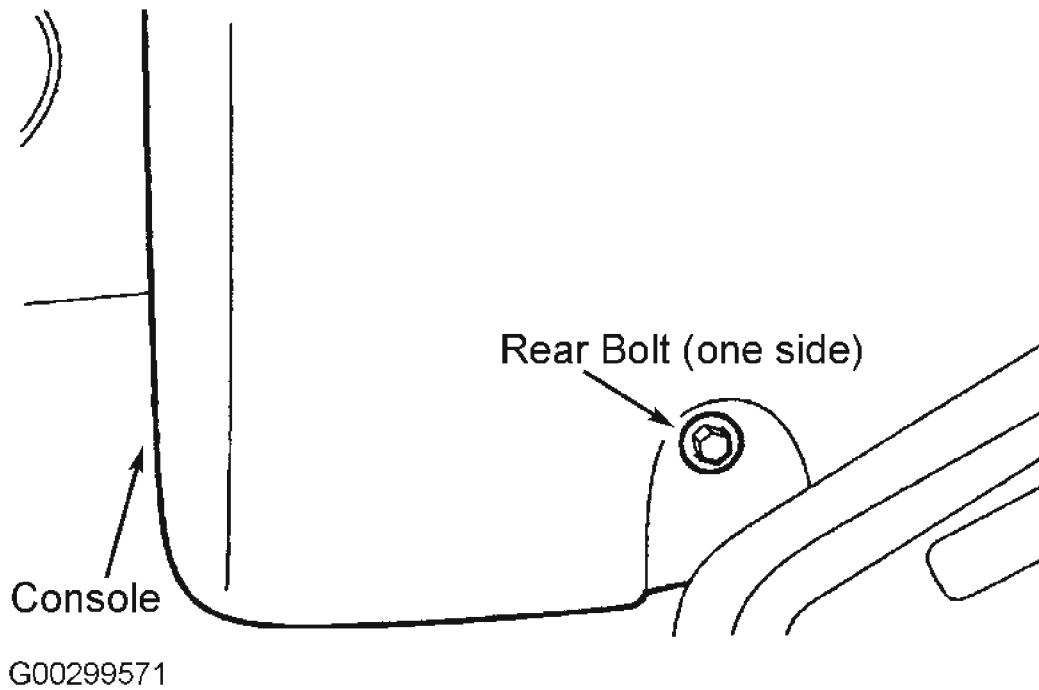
Identifying Console Rear Bolts (High Series)
